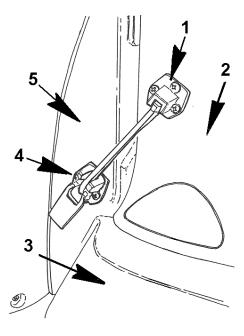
Hood Latch Assembly (Passenger Side Shown)
